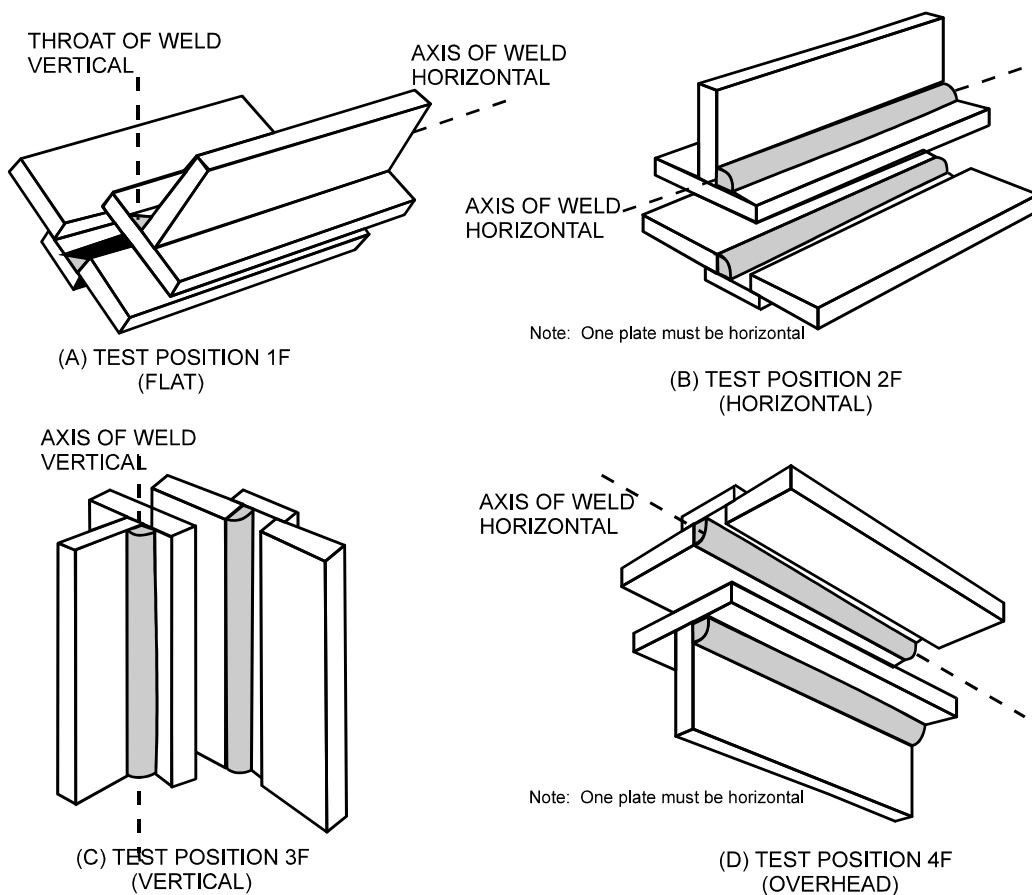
Position of Test Plates for Fillet Welds (see 5.6.1.3)
